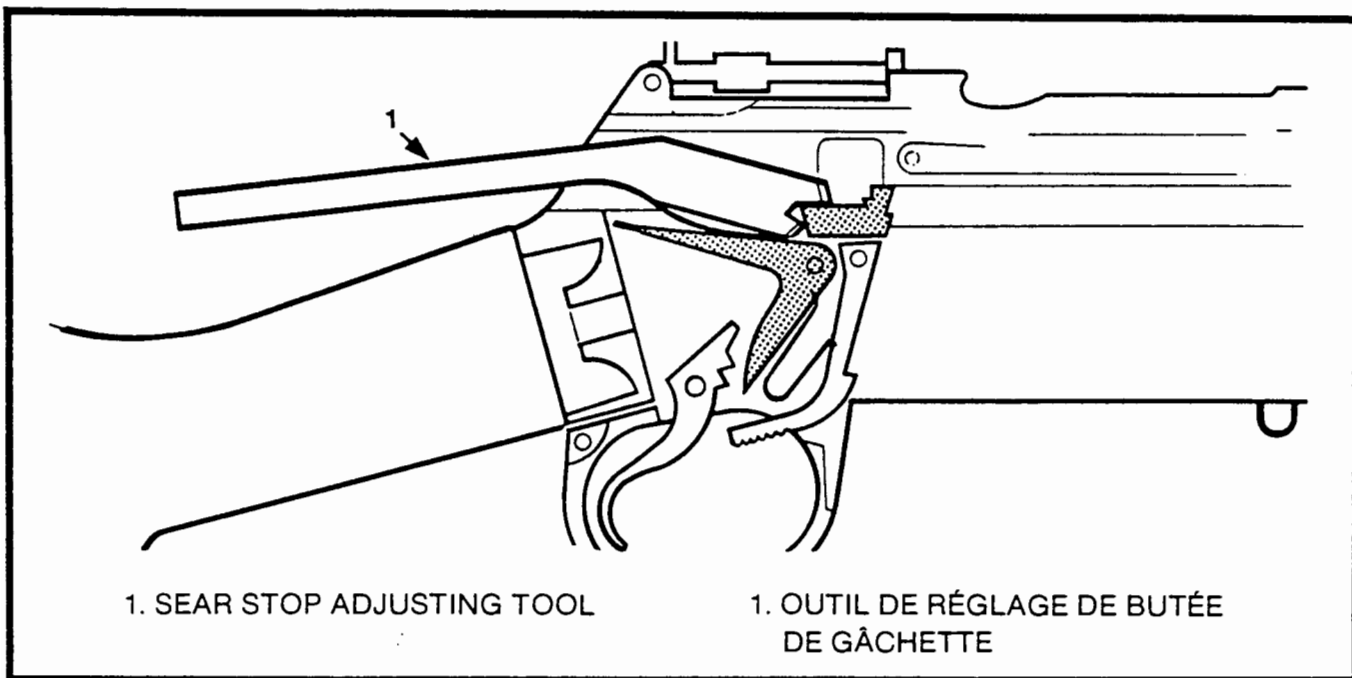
Position of the Sear Stop Adjusting Tool
